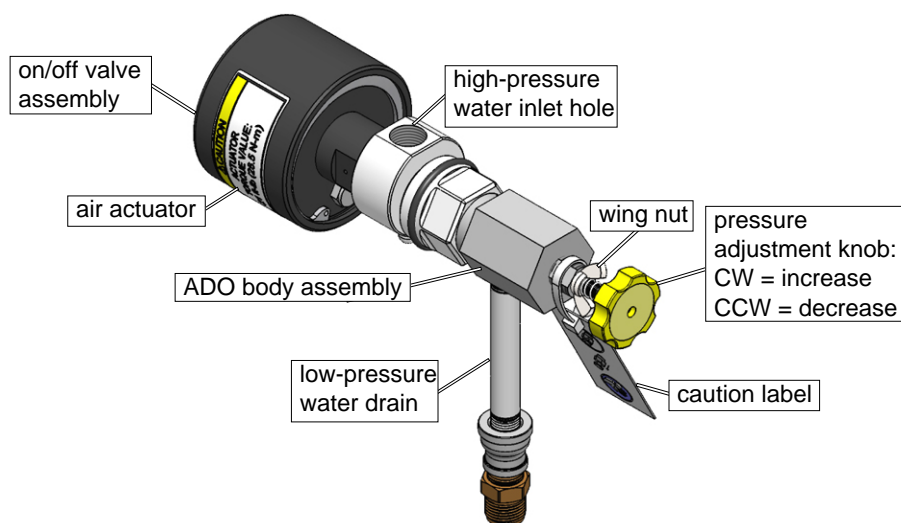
Remove the On/off Valve from the ADO Body Assembly
